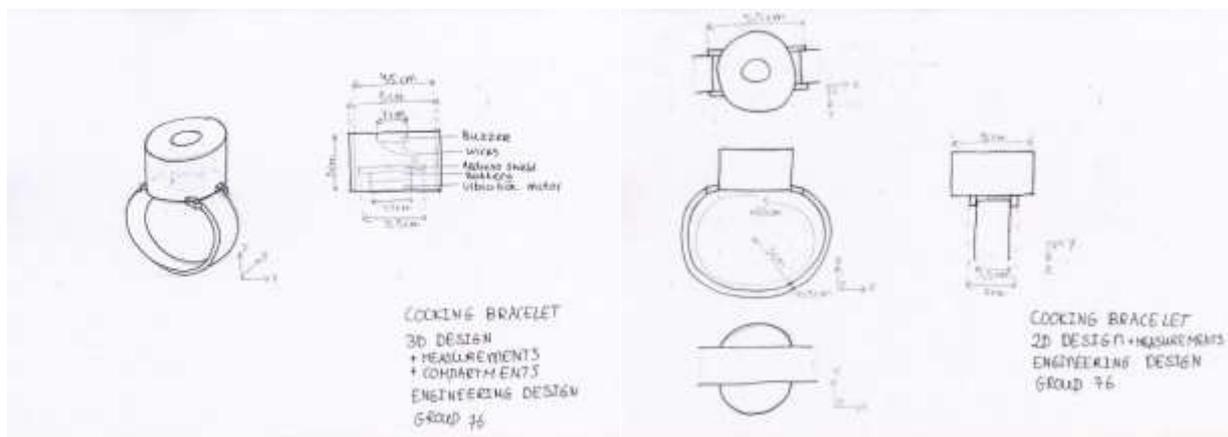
3D sketch bracelet with dimensions      Figure 26: 2D sketch bracelet with dimensions
